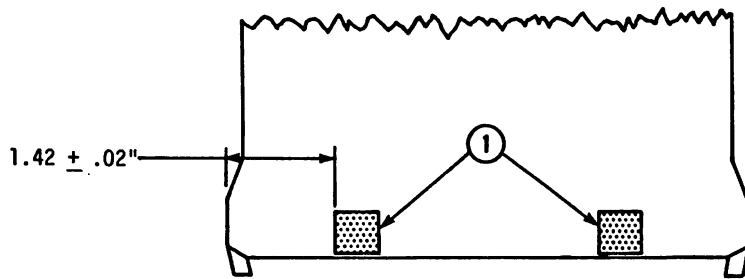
KICKER SHAFT ASSEMBLY - FRONT VIEW
